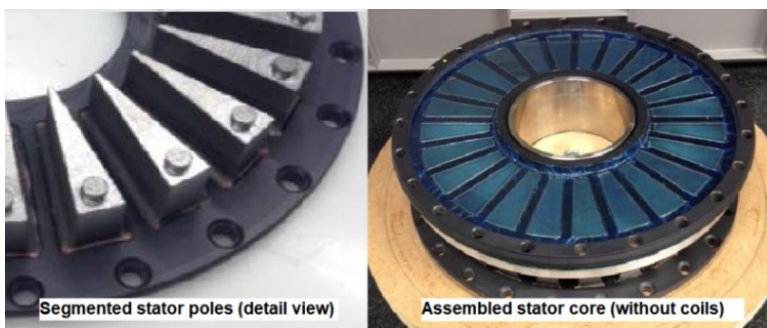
Stator of the first prototype machine. Figure based on [6].
